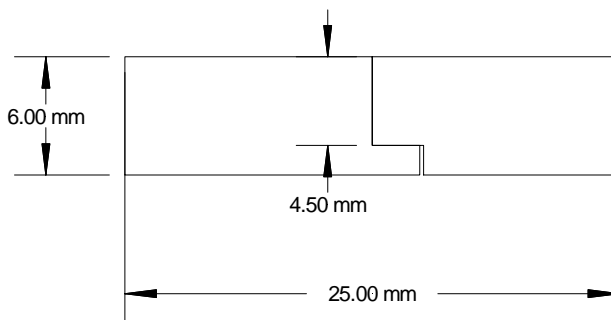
Cross section of the weld coupon showing the step joint configuration. The laser impinges on the top surface of the coupon, and a small gap is left on the bottom to insure no gap along the weld seam.
